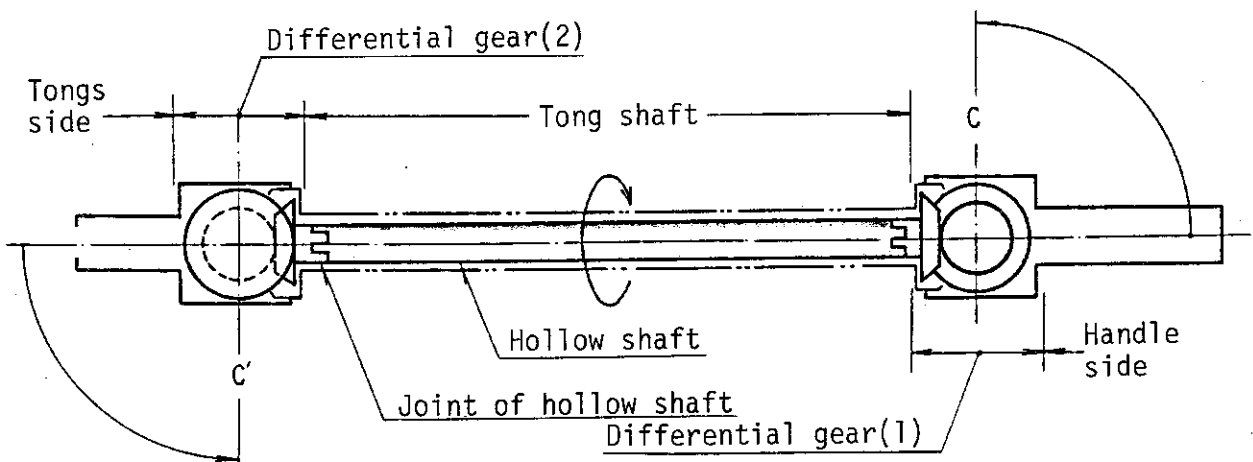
Handle inflection mechanism of the type A 15 ball-socket tong manipulator
